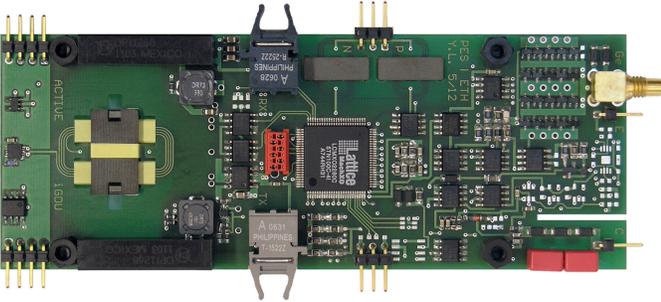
Prototype of the closed-loop IGBT gate drive; PCB dimensions: 50 mm x 133.3 mm and/or 1.97 in x 5.25 in
